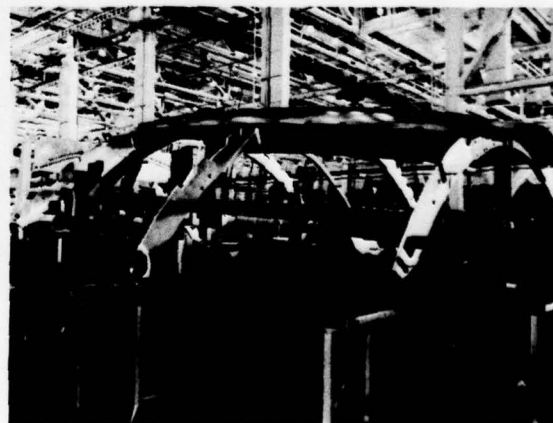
NONCONSTANT SECTION ASSEMBLY TOOL
